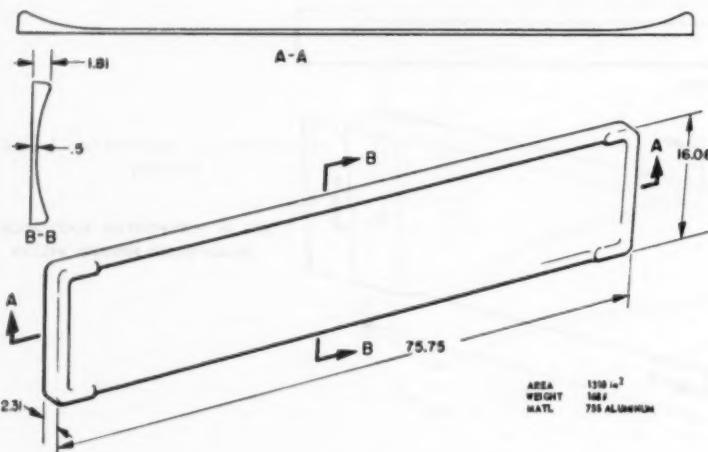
CONSTANT-SECTION SPAR BLOCKER-DIE-TYPE FORGING
